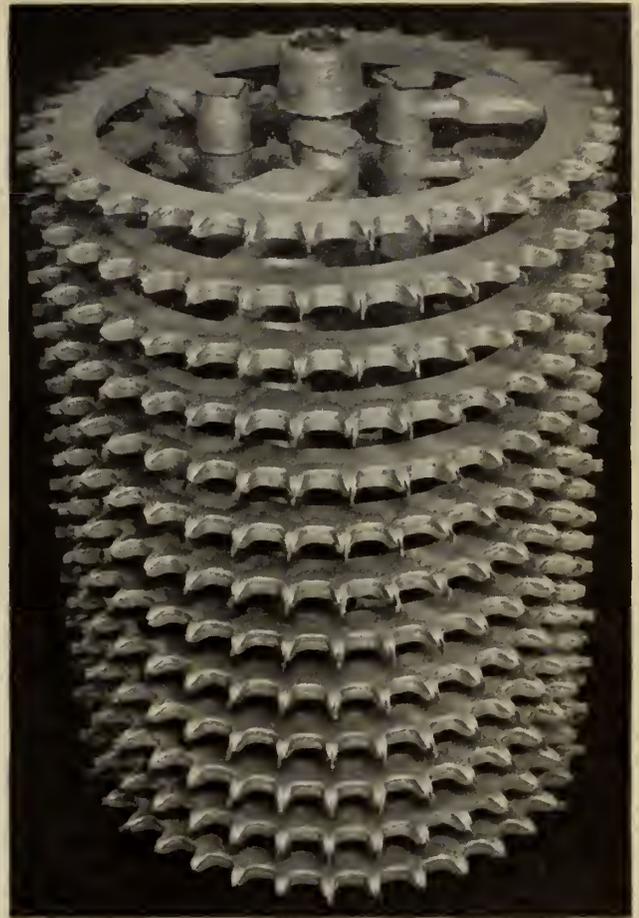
Universal carrier drive sprockets produced in "christmas-tree" mould.
